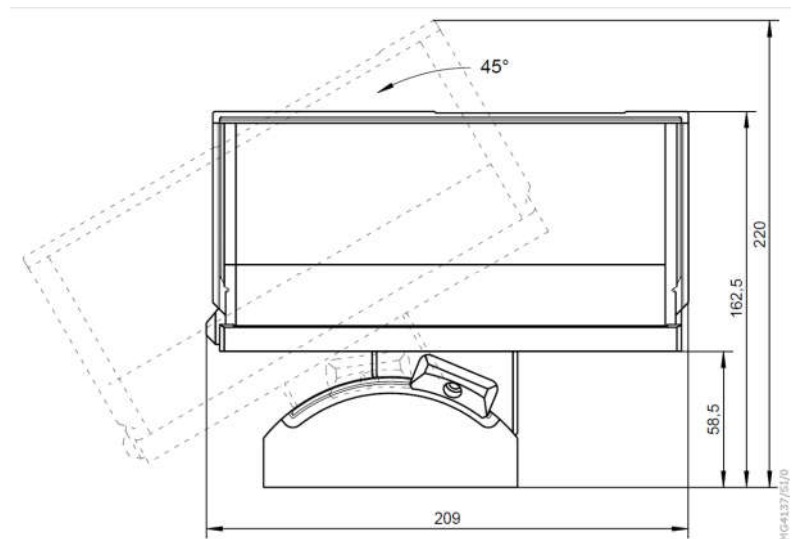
Double swivel mount with laser device (dimensions in mm)
